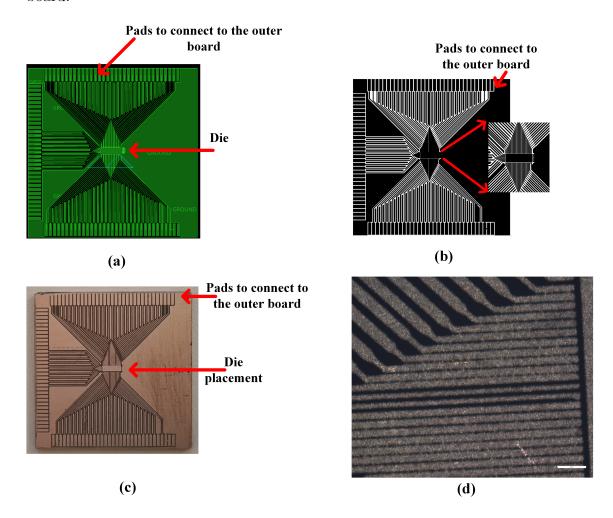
(a) Layout, (b) mask (c) patterned PCB and (d) zoomed-in view of the patterned PCB for the inner board using flip chip
